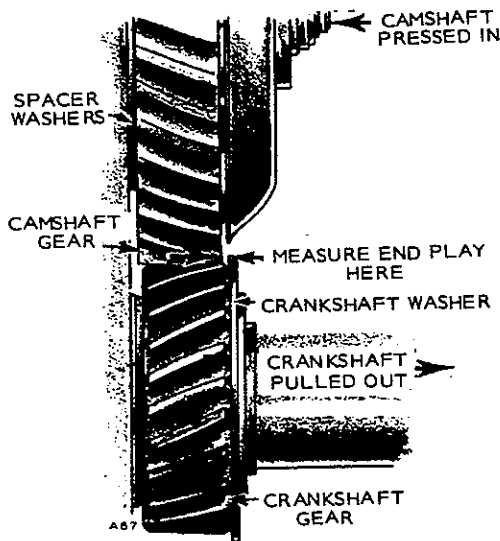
MEASURE CAMSHAFT ENDPLAY
